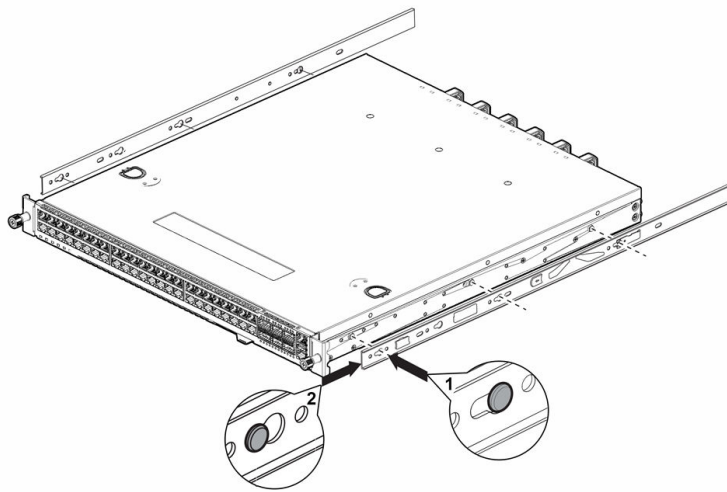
Attaching a Mounting Bracket to One Side of the Switch Housing
